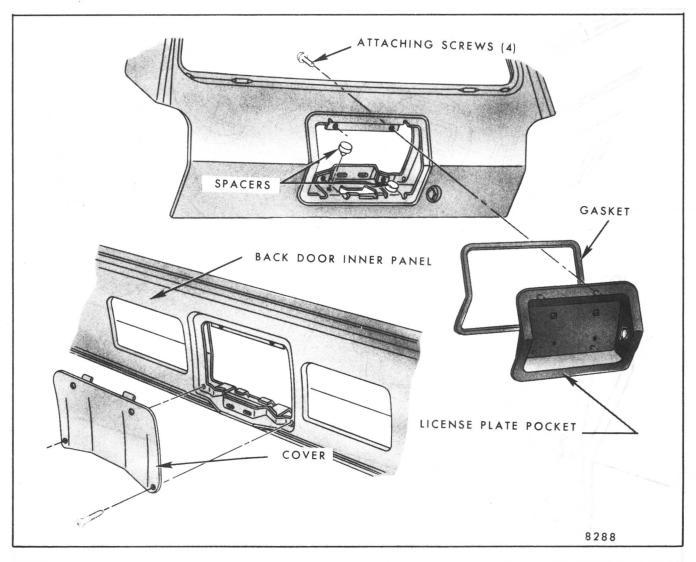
License Plate Pocket and Inner Cover - "H-15" Styles
